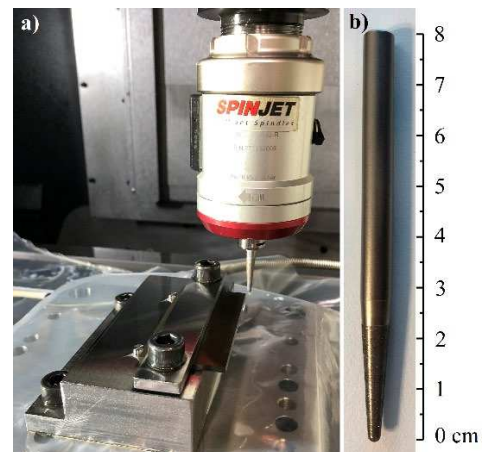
(a) Experimental setup; (b) 6mm diameter tapered B76 CBN point grinding tool.
